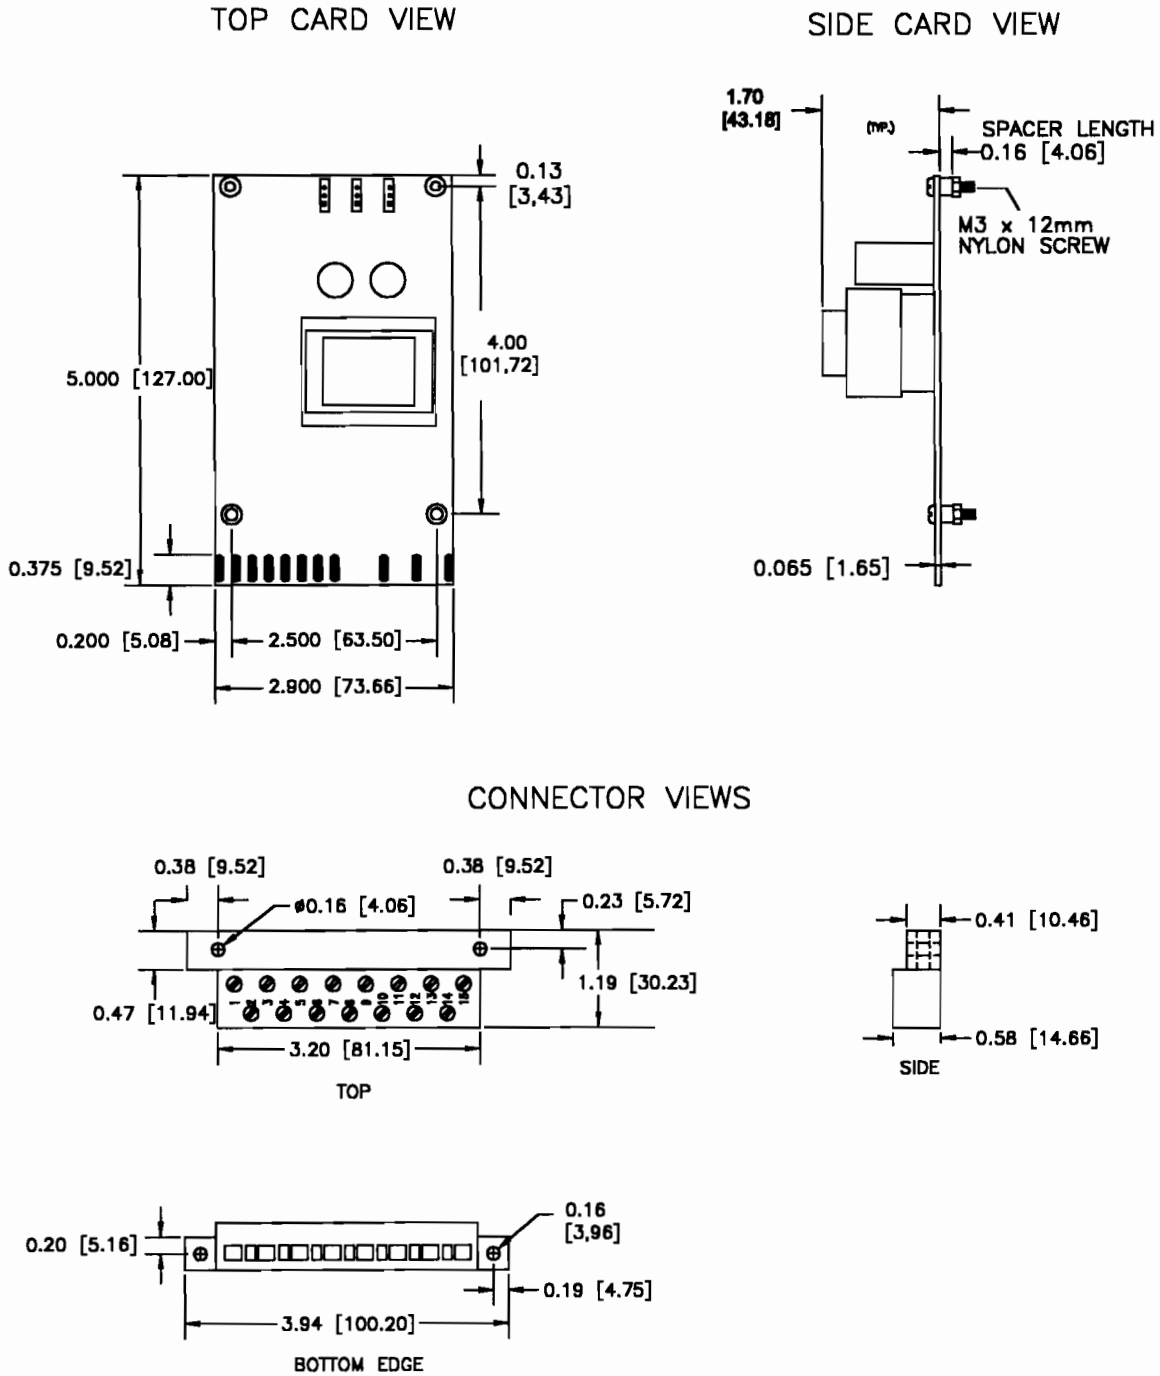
HORIZONTAL MOUNTING DIMENSIONS
